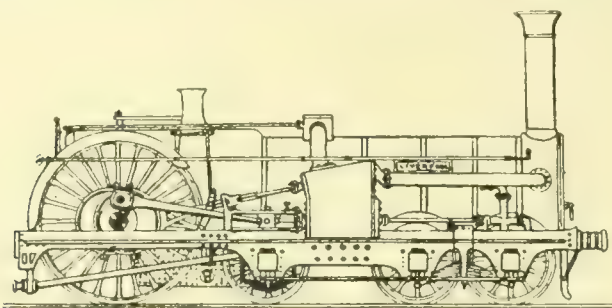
CRAMPTON OUTSIDE 2-CYLINDER SINGLE DRIVER ENGINE.
